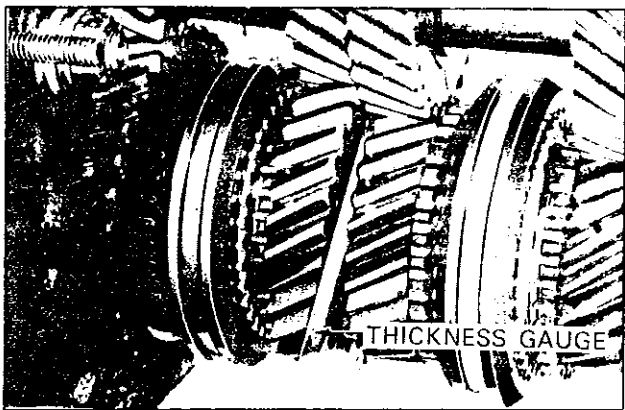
Measuring end play between 2nd and 3rd gears
